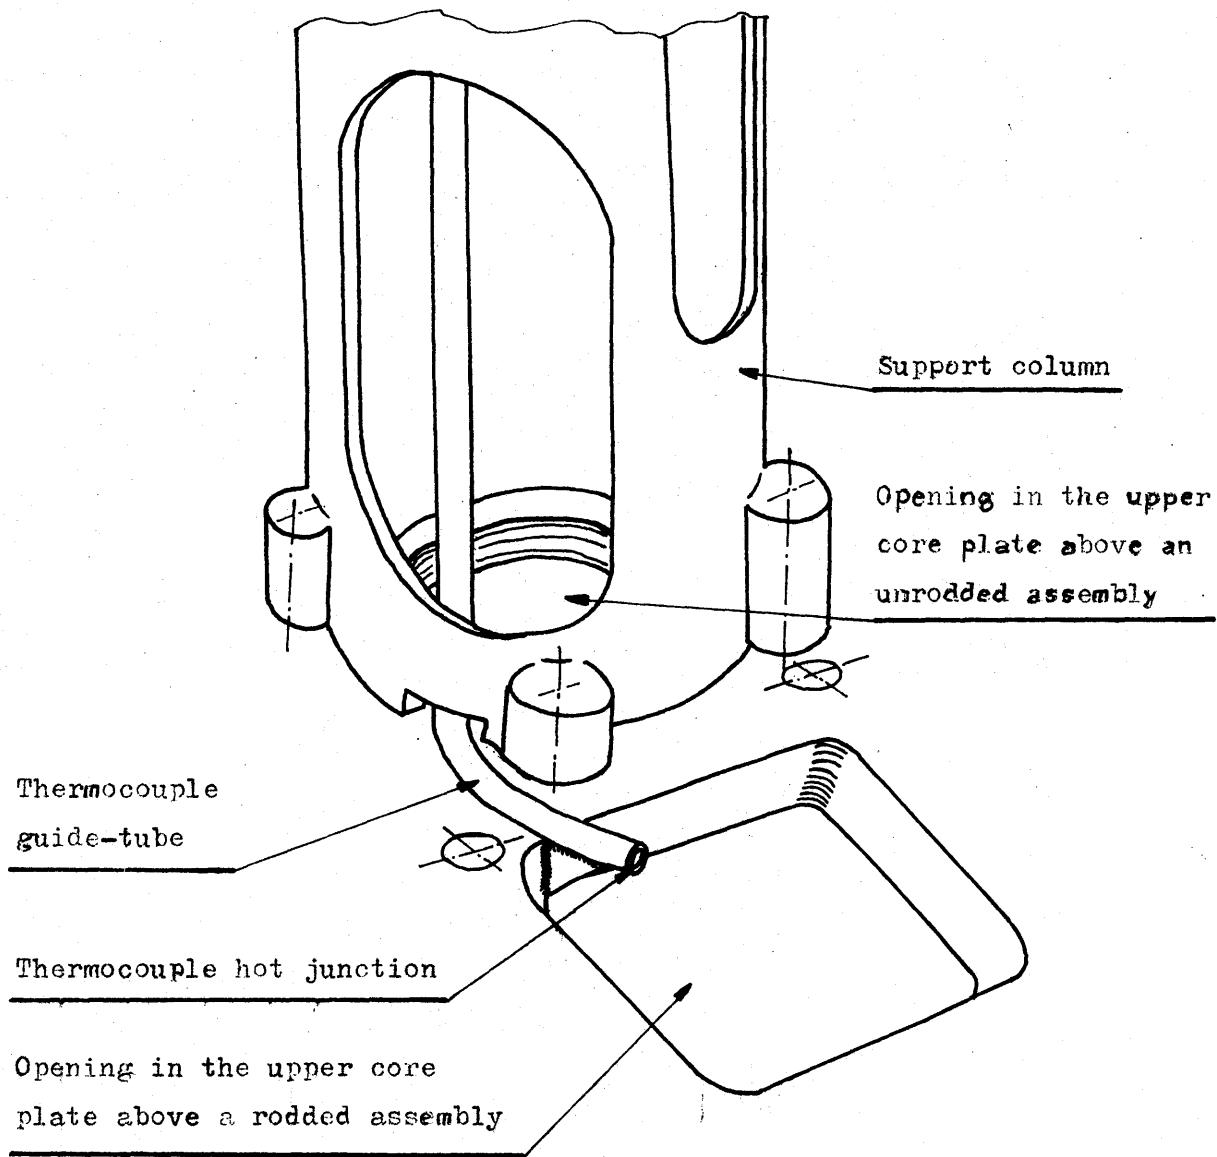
a Arrangement of the assembly exit thermocouple on the upper core plate. (From Ref. 5)
